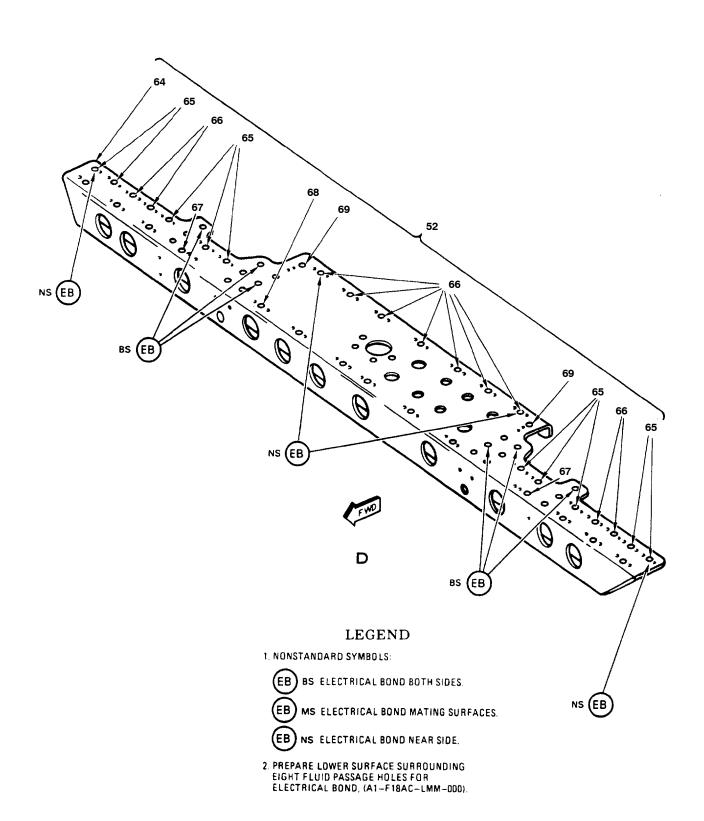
Upper and Lower Support Assemblies (Sheet 3)
